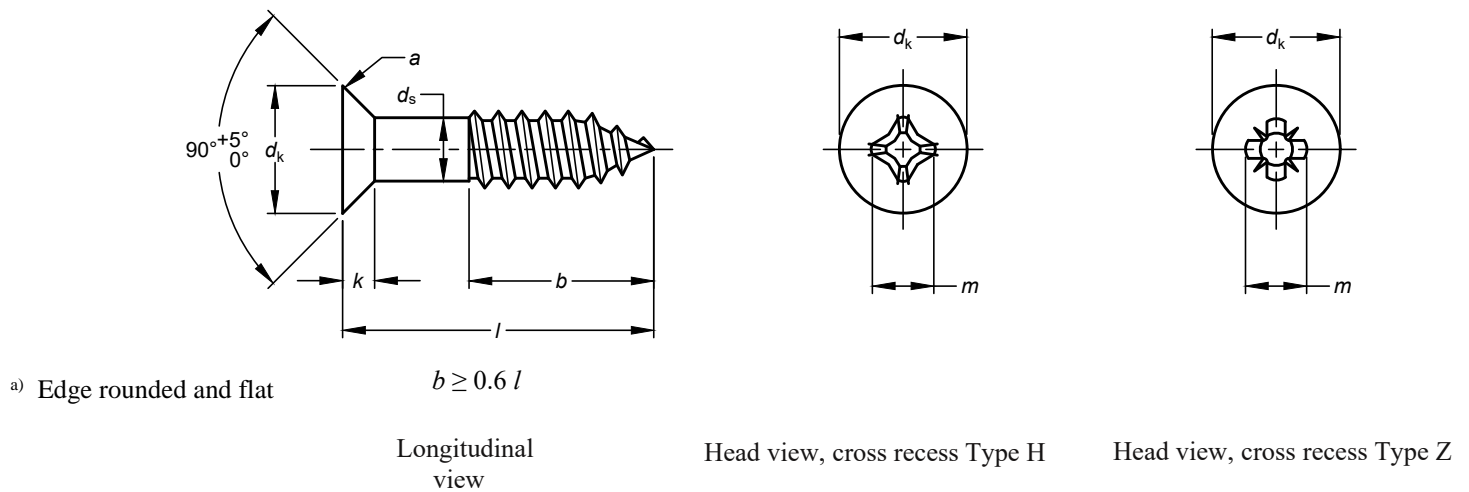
DIMENSIONS OF COUNTERSUNK HEAD WOOD SCREW
